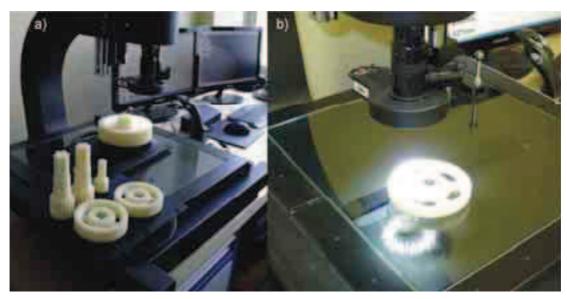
A measurement stand with VENTURE BATY optical system: a) overall view, b) measuring a toothed wheel with light radiated from measuring head
